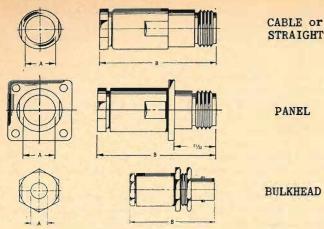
Jacks tie cables to each other or to panels. Dimension A is the cable o.d.; Dimension B is jack length.
